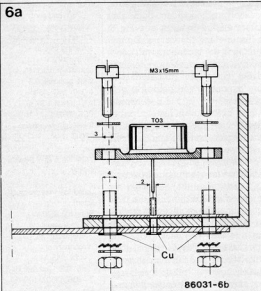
Dimensional outlines of the support bracket which forms the thermal contact between transistors and heat-sink. Also shown are transistor mounting details.
